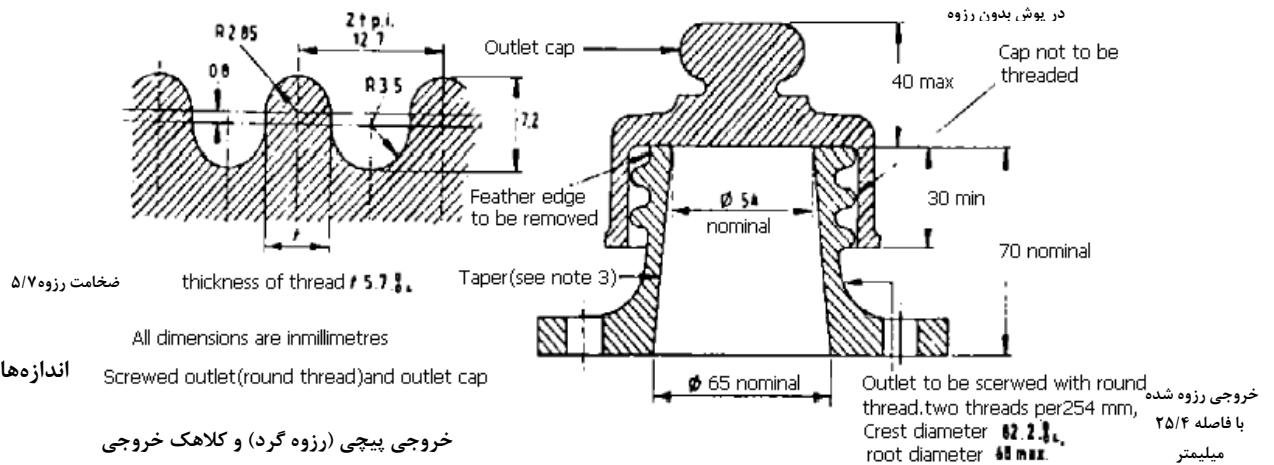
SCREWED OUTLET (ROUND THREAD) AND OUTLET CAP
